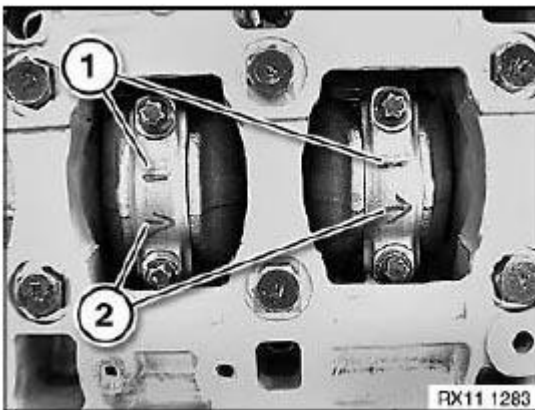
Identifying Timing Chain Drive Direction And Cylinder Assignment Marks
